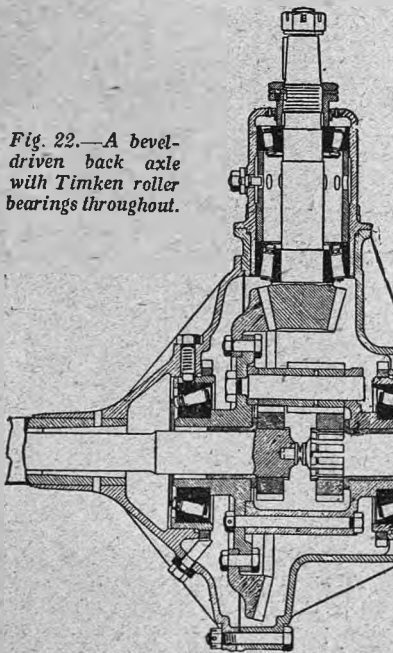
A bevel-driven back axle with Timken roller bearings throughout.
